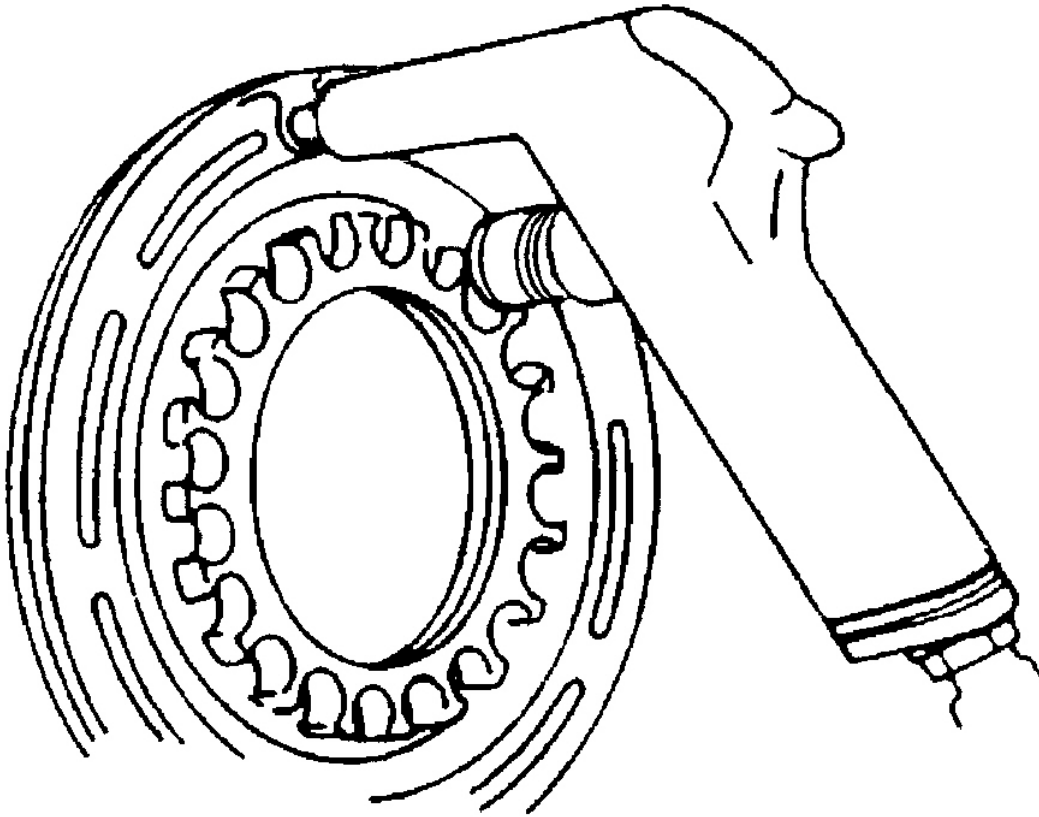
Applying Air Pressure To Remove OD Clutch Drum From Oil Pump
